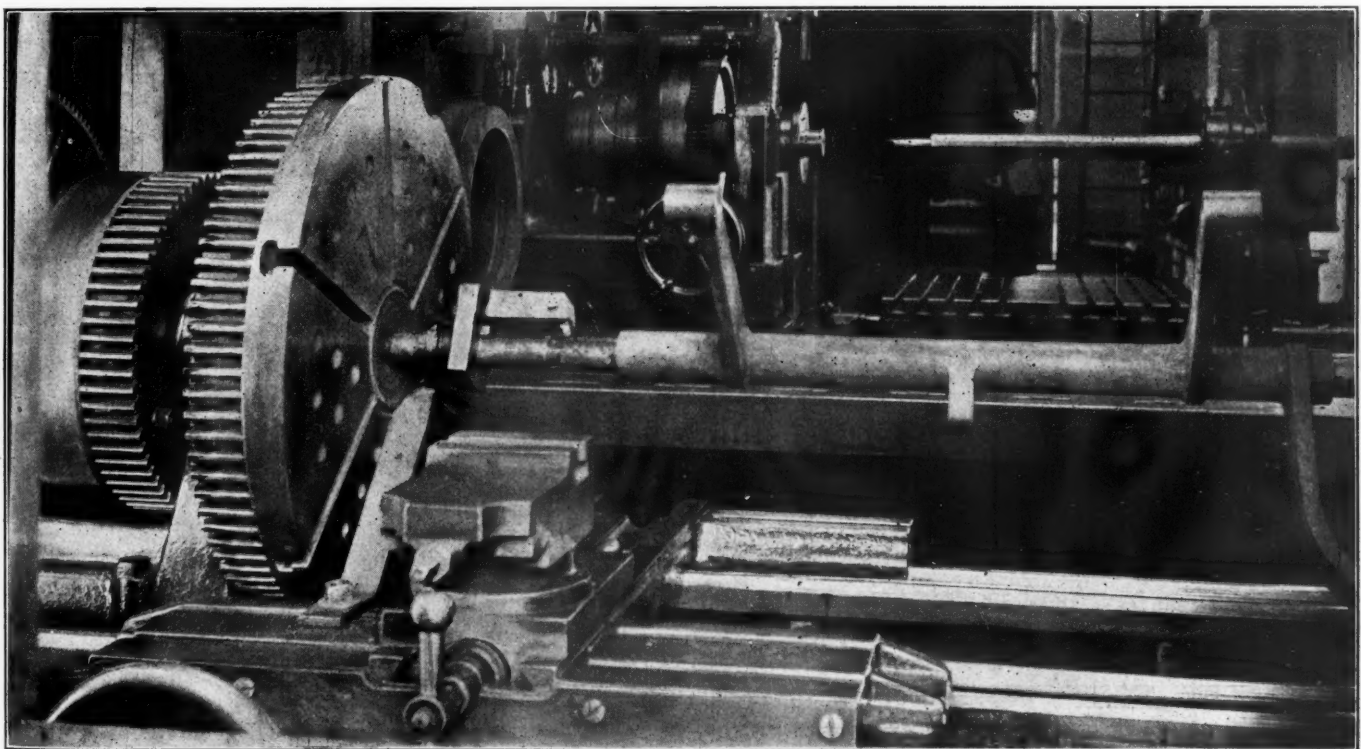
Lathe Tool for Turning Reverse Shaft Bearings.
